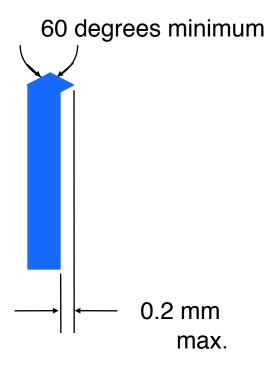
Burr geometry on the edge of the sheet steel, good enough to prevent rust. Figure 10 shows the burr geometry that is good enough to avoid the burr being a site for rust to start. Qualitatively the burr must be blunt. It should not be a "feather" sticking out, which is easily bent and/or broken.
